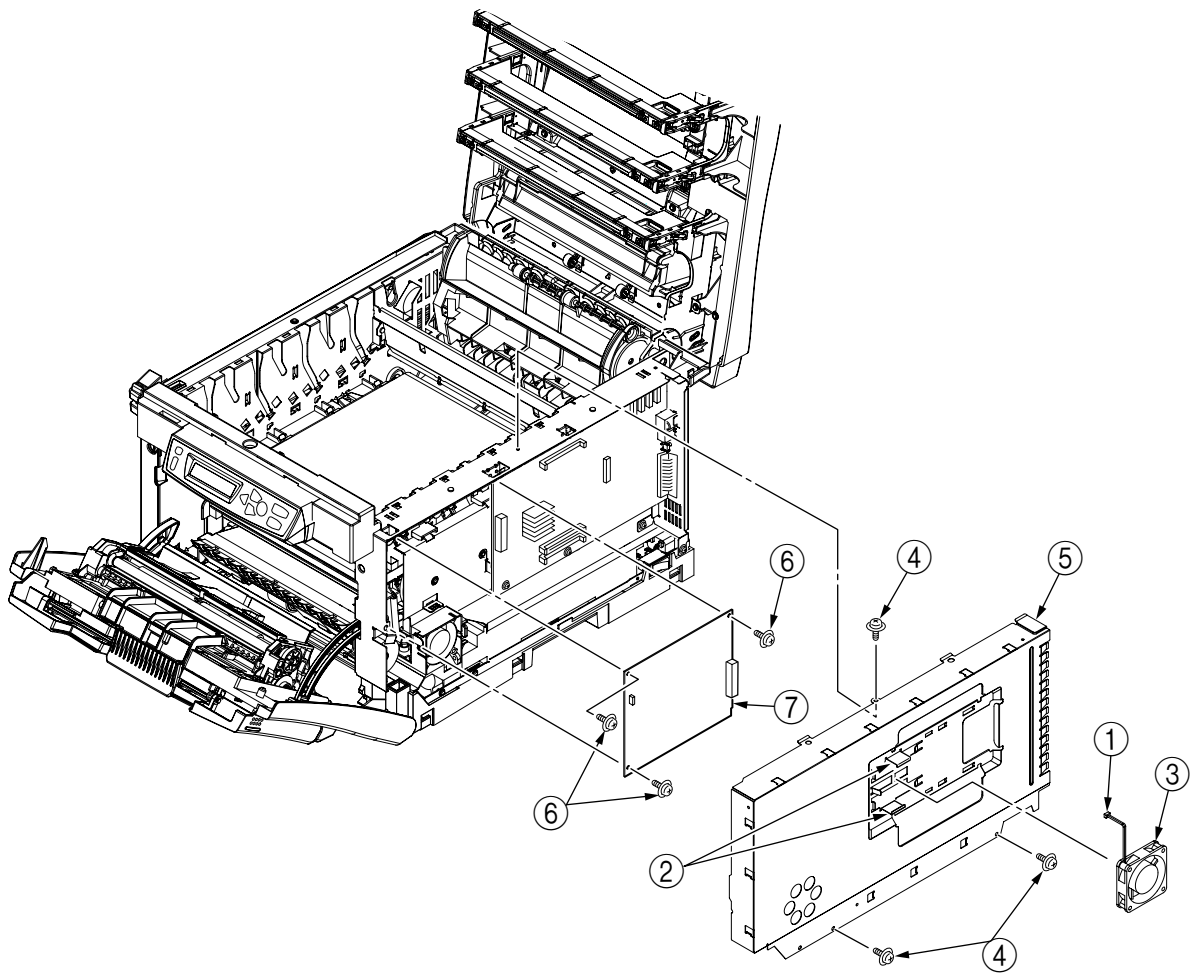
Print Engine Controller PWB (C5300)
